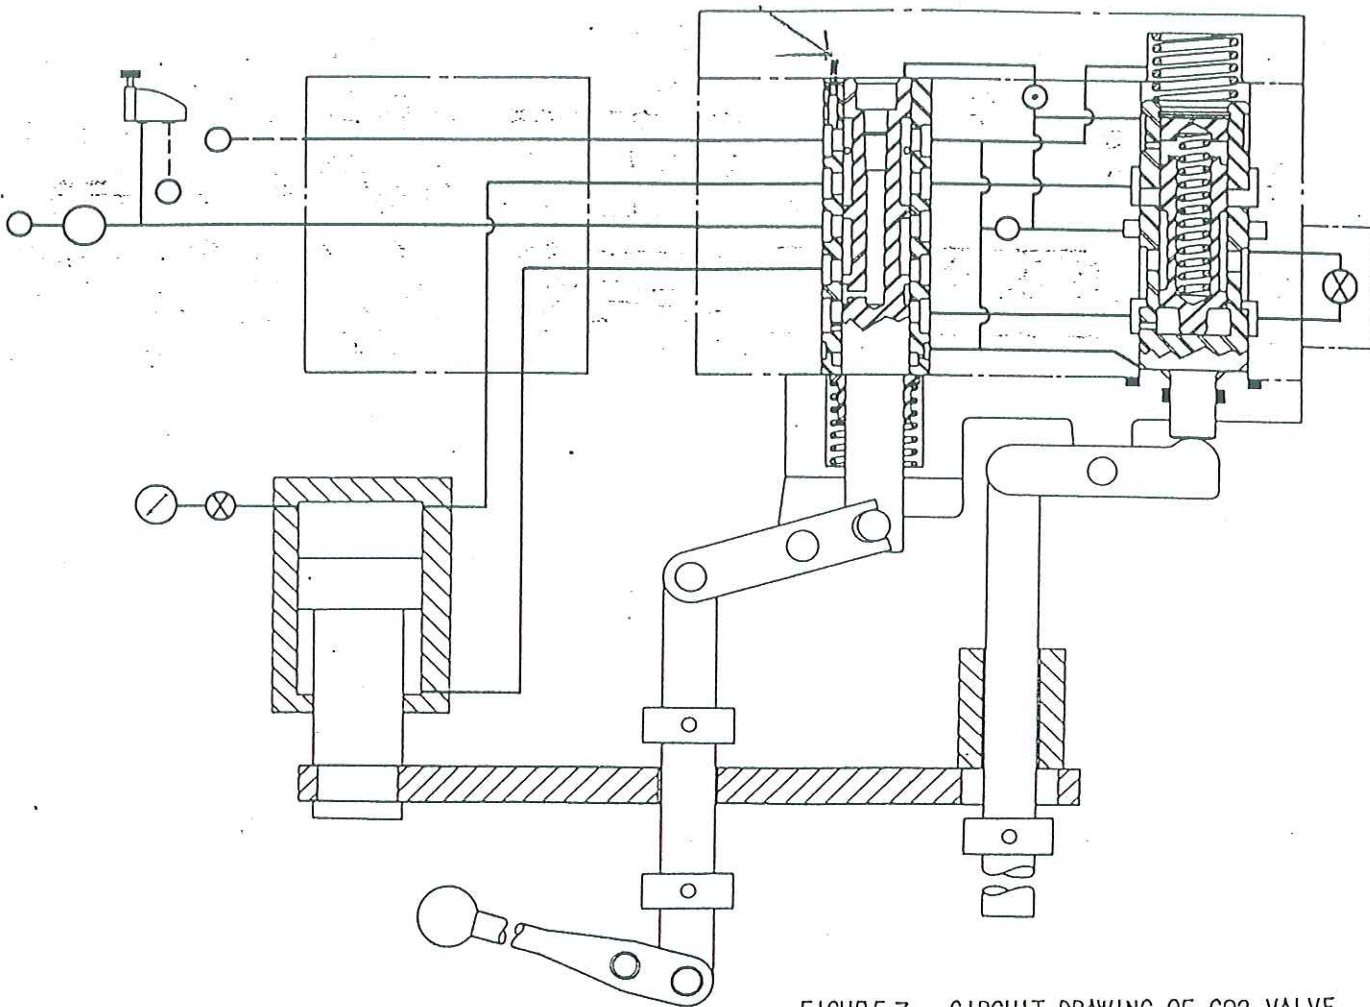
CIRCUIT DRAWING OF C92 VALVE
